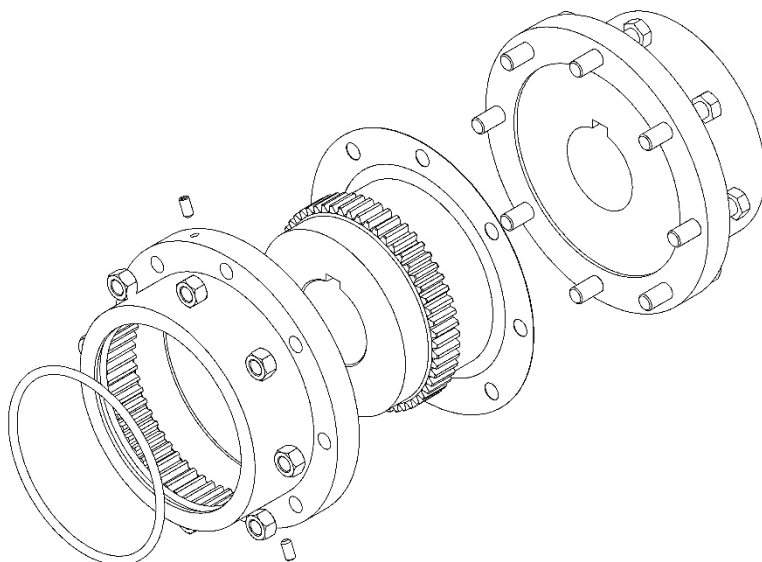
STEEL GEAR SINGLE FLEX COUPLING (ISO)
